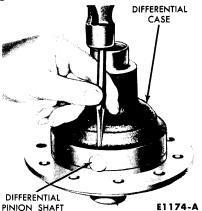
Differential Pinion Shaft Lock Pin Removal
